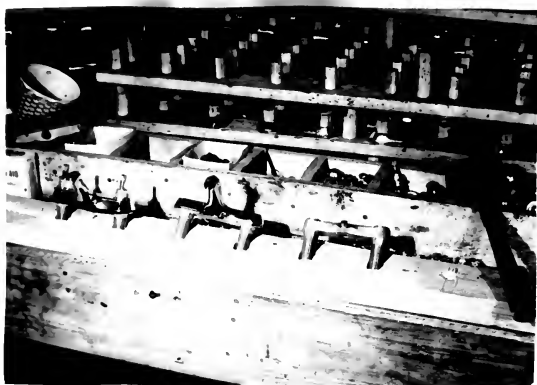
Wooden Fixture For Holding Threaded Sections Of Double Faucet During Assembly of Apron and Valve Stems
